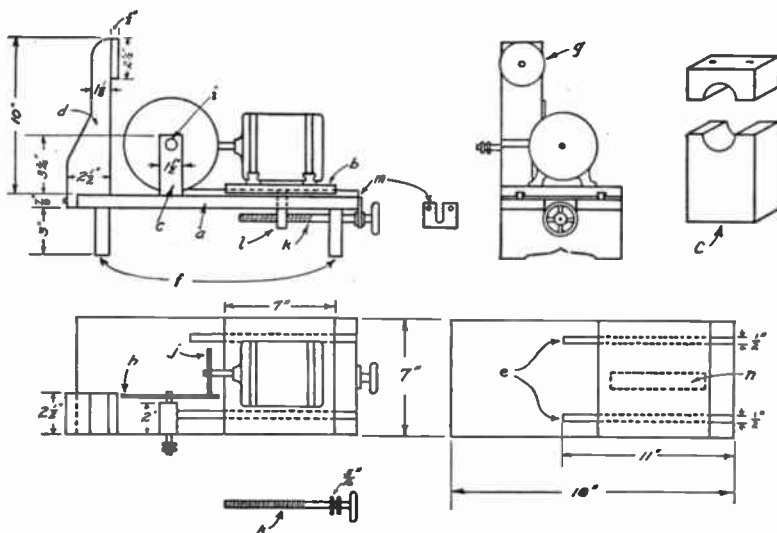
Detailed Drawing of Scanning Disc Mounting and Synchronizing Control.
